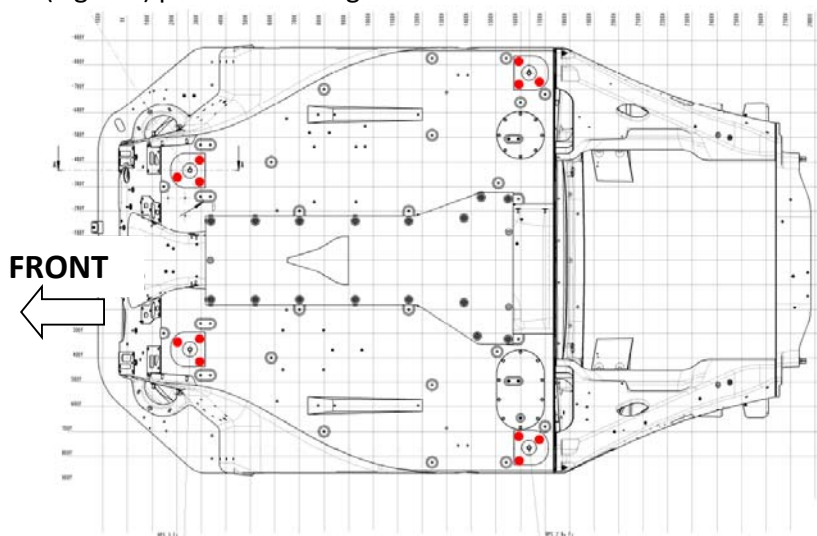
View from the bottom of the car, Schematic position of the fastening holes on all RPS
